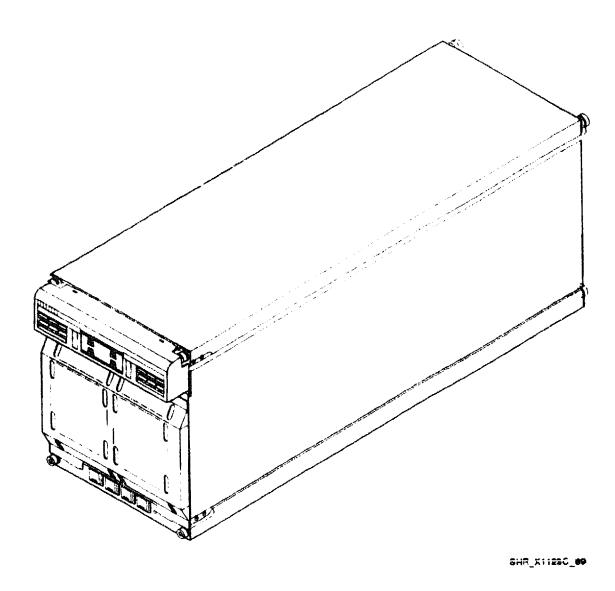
SF72 Storage Enclosure in Extrusion Tube
